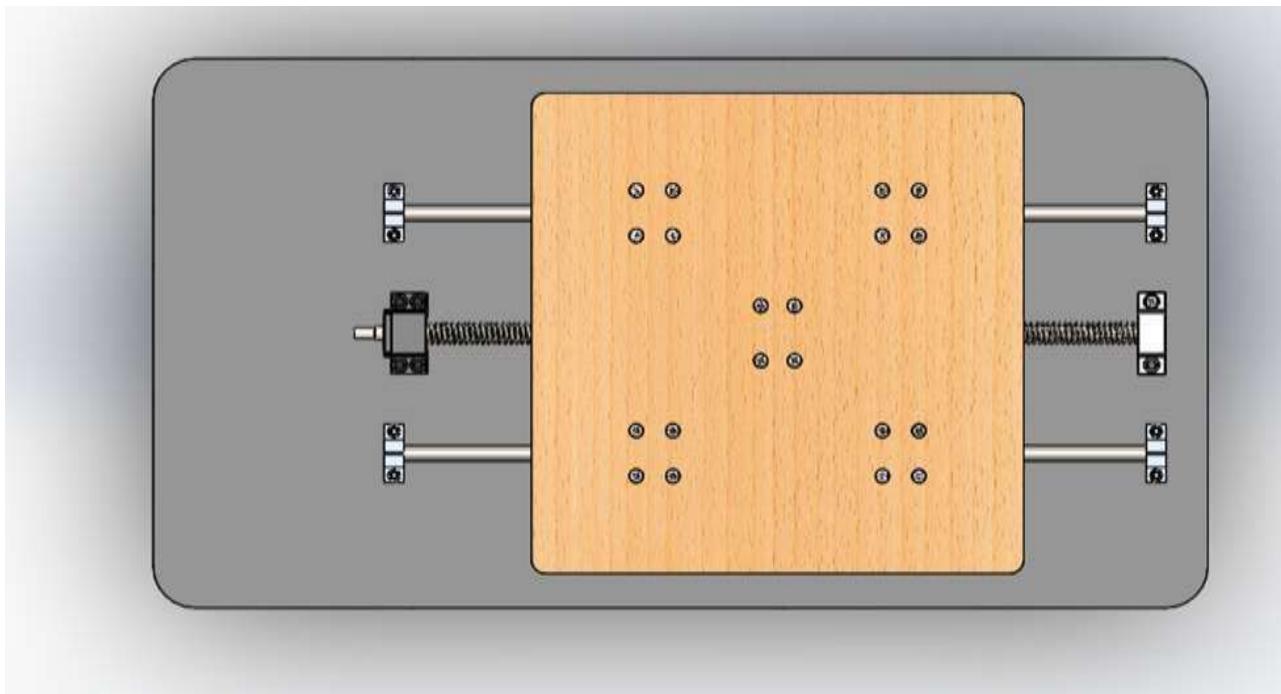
install table in and lead Screw Nut Seat Bracket Holder Mount Housing by using screws
